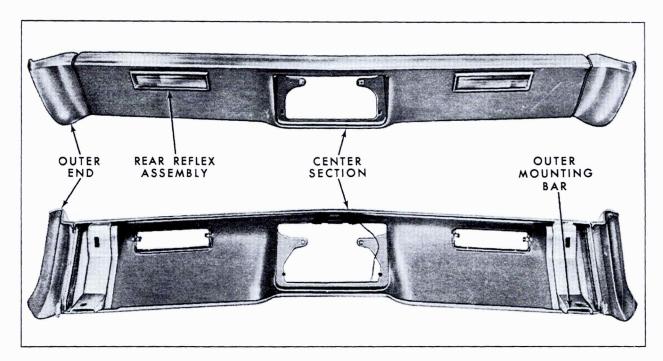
Eldorado Rear Bumper - Front & Rear View
